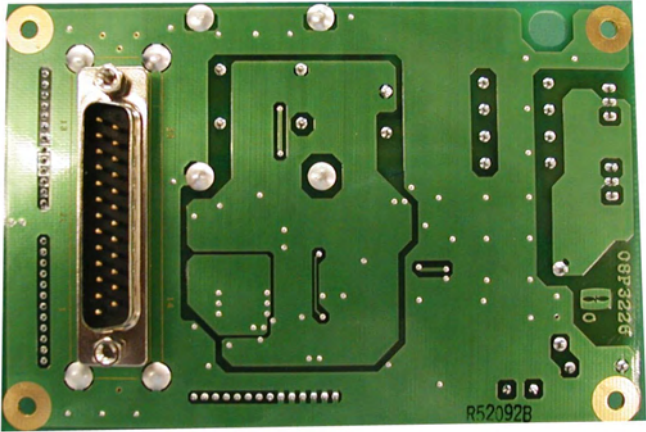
PWR (Printer Power board): 08P3226, side-B
